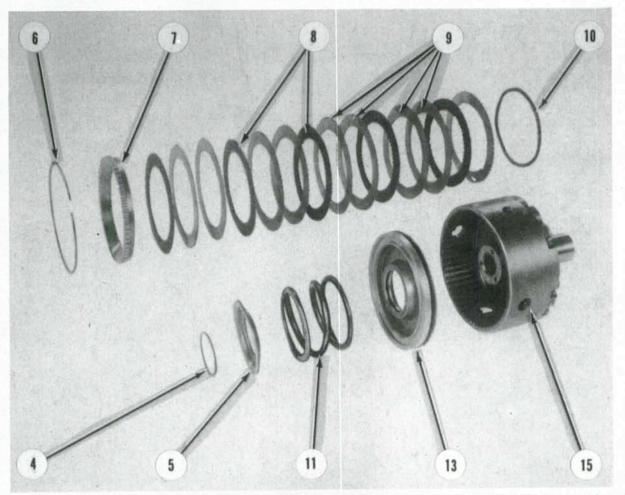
On Models TW-5, TW-15 and TW-25, two externally splined driven plates (9) are installed between internally splined friction drive plates (8).
